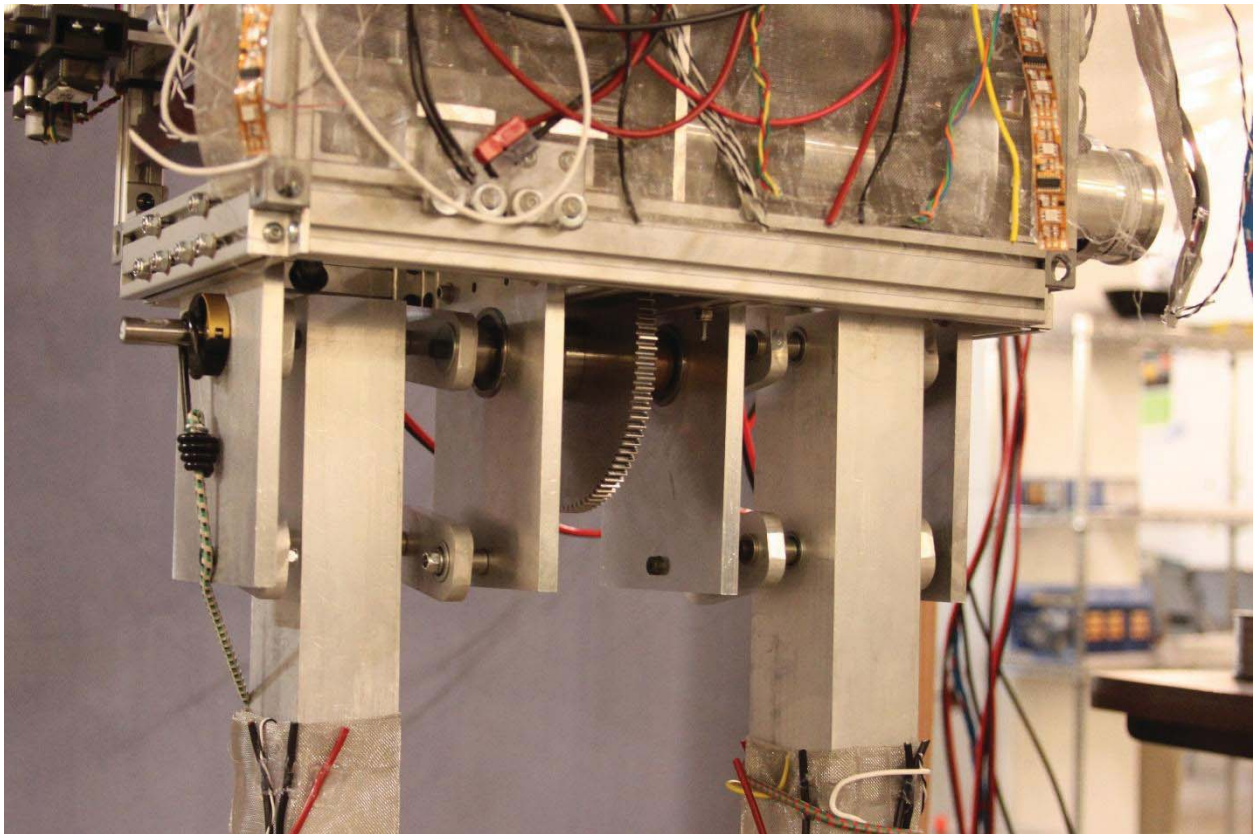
Fully Assembled and Integrated Four-Bar Linkage Mechanism
